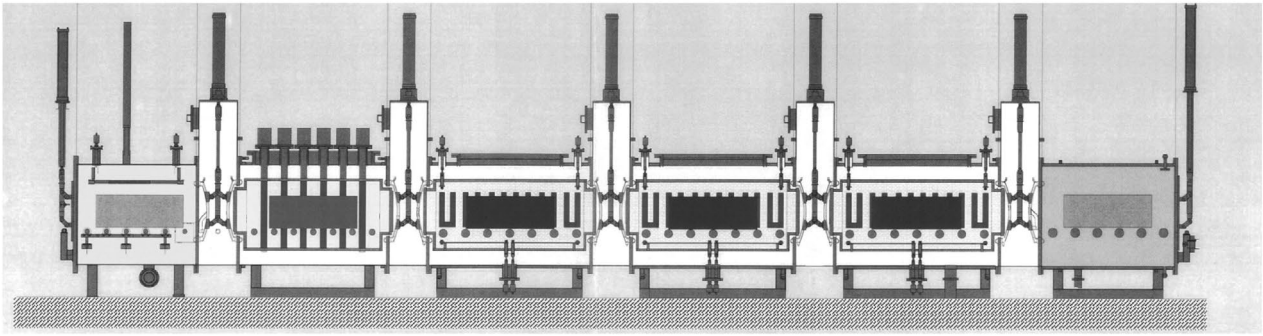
Roller hearth type continuous vacuum sintering furnace.
